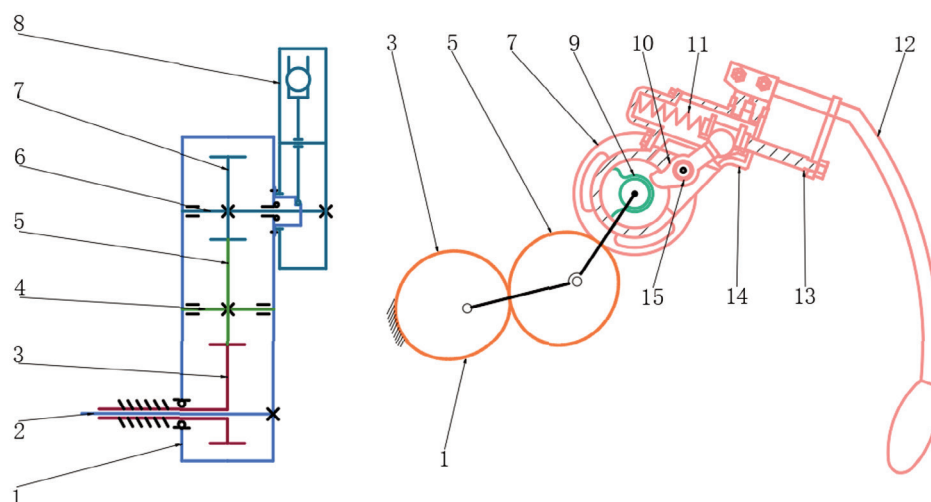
Schematic diagram of the sweet potato seedling transplanting mechanism with a modified elliptical gear planetary transmission system. 1. Gearbox housing (planetary carrier). 2. Drive shaft. 3. Sun gear. 4. Intermediate shaft. 5. Intermediate gear. 6. Planetary shaft. 7. Planetary gear. 8. Transplanting arm. 9. Cam. 10. Fork. 11. Spring. 12. Gripping claws. 13. Push rod. 14. Transplanting arm housing. 15. Fork shaft.
